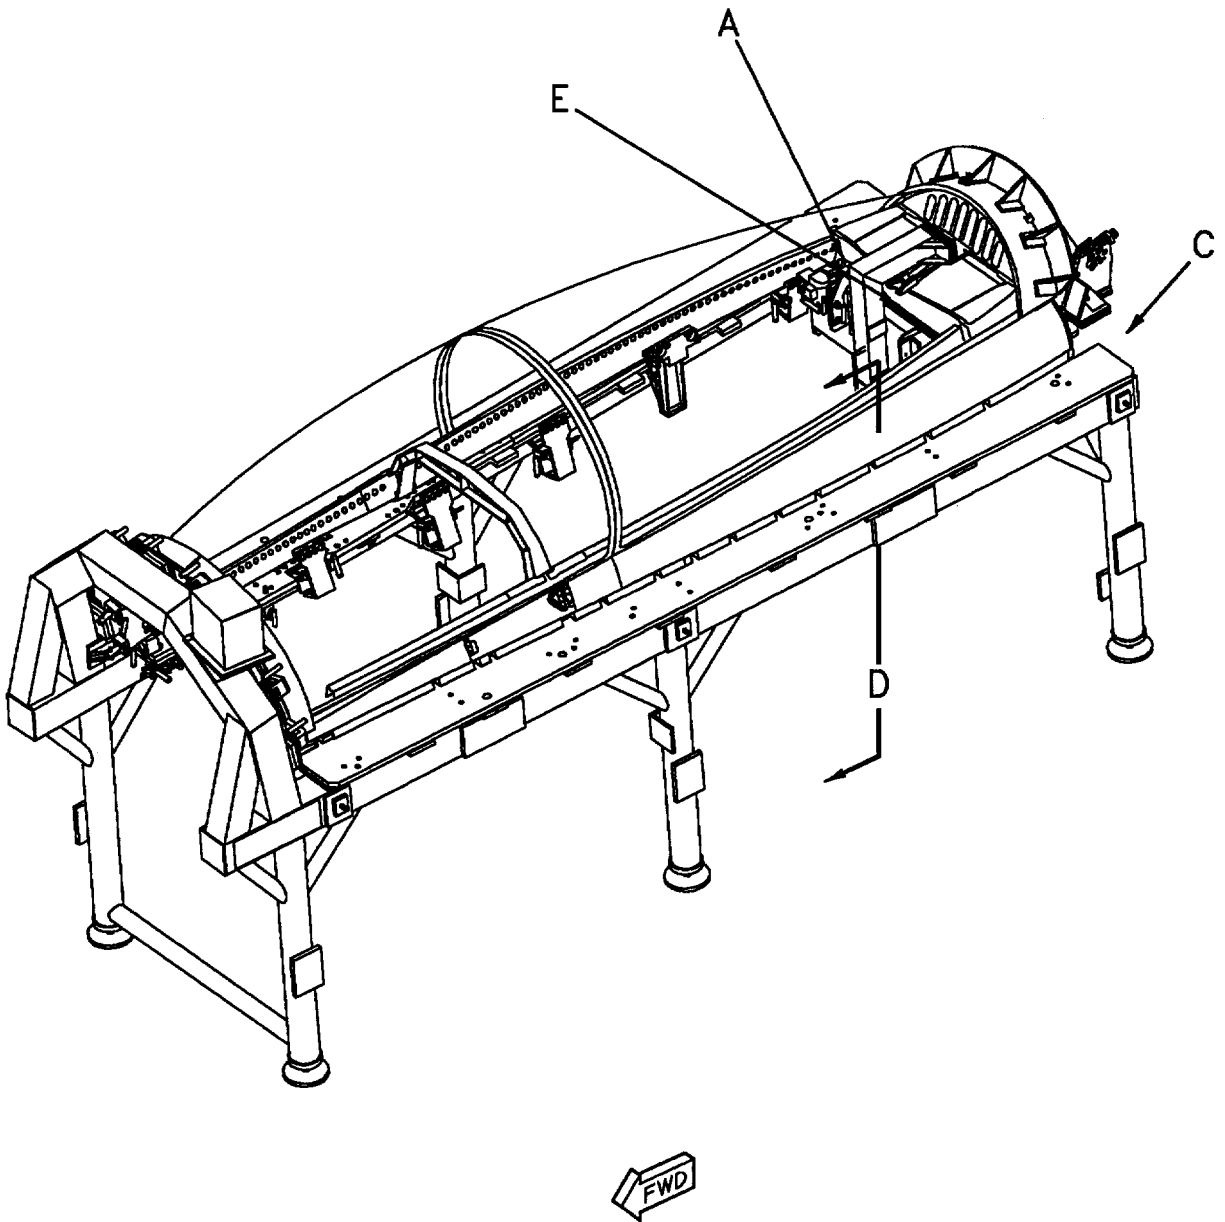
Inspection and Replacement - Aft Seal Retainer (Sheet 1)
